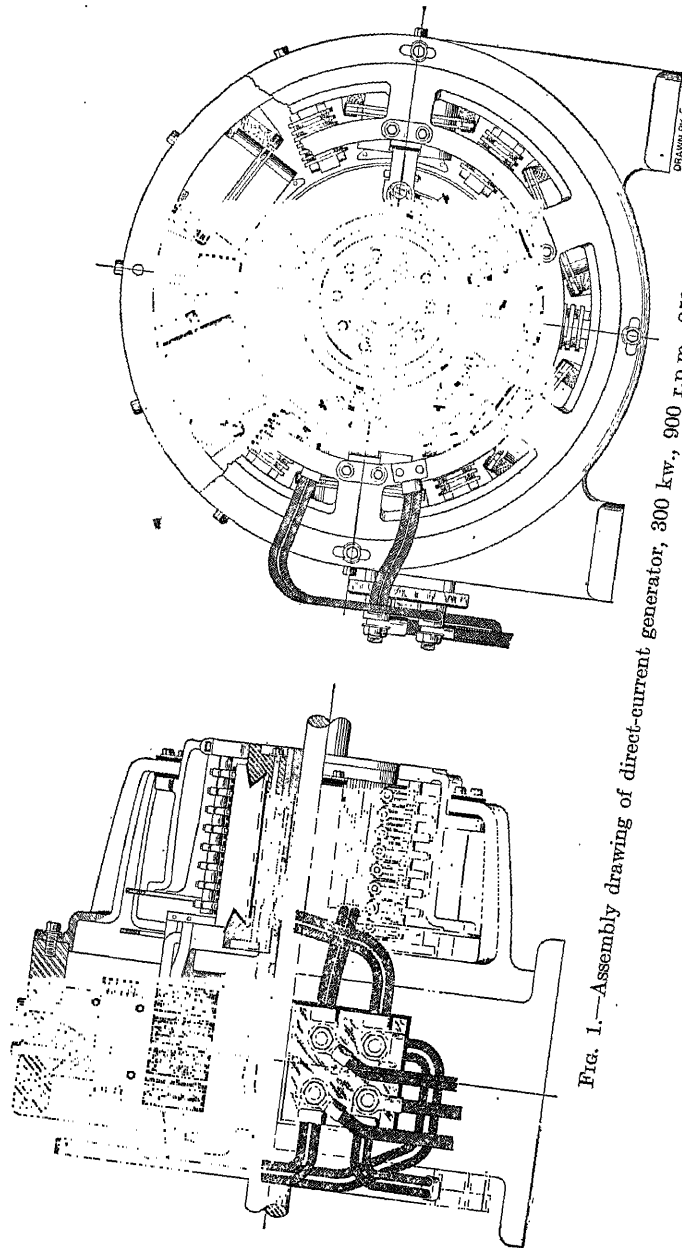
Assembly drawing of direct-current generator, 300 kw., 900 r.p.m., 250 volts.
